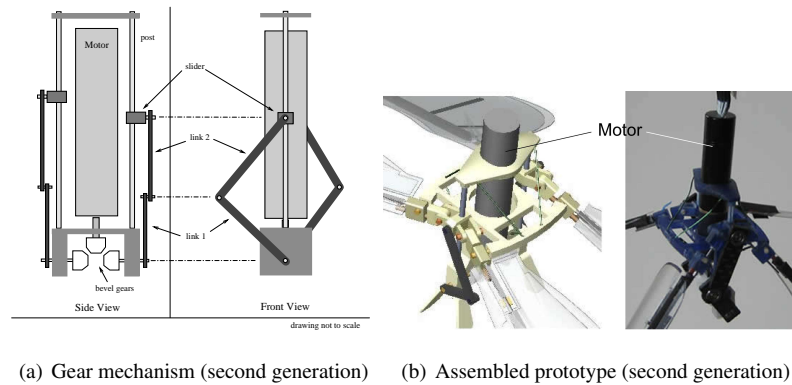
Gear mechanism and assembled prototype of the second generation robot
